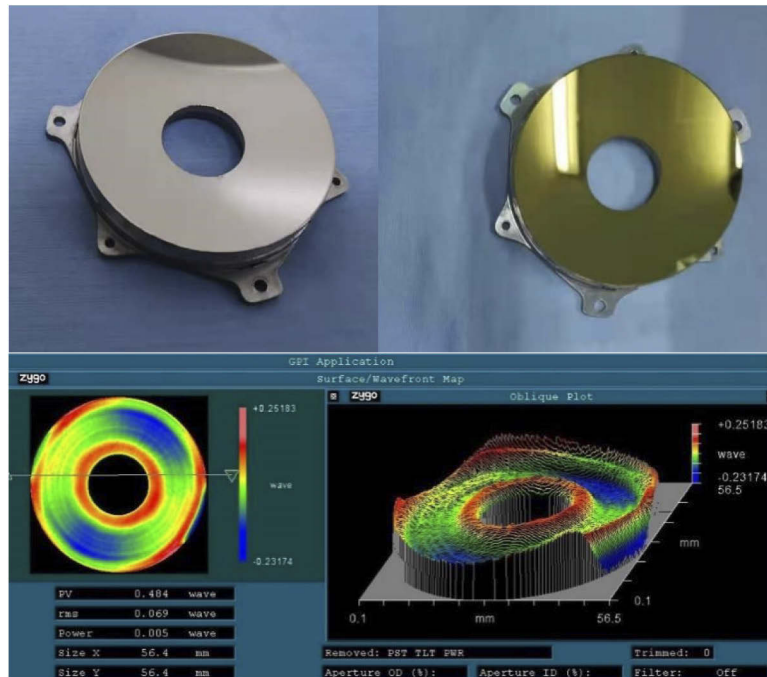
Mirrors assembly after SPDT, coating, and optical inspection results of the mirror assemblies.
